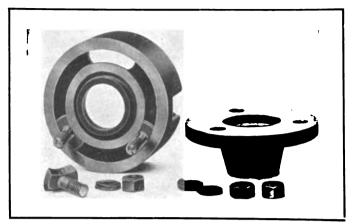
Showing the Components of Bosch Coupling, Including Cone Member, Flange, Crossbar and Bolts.
